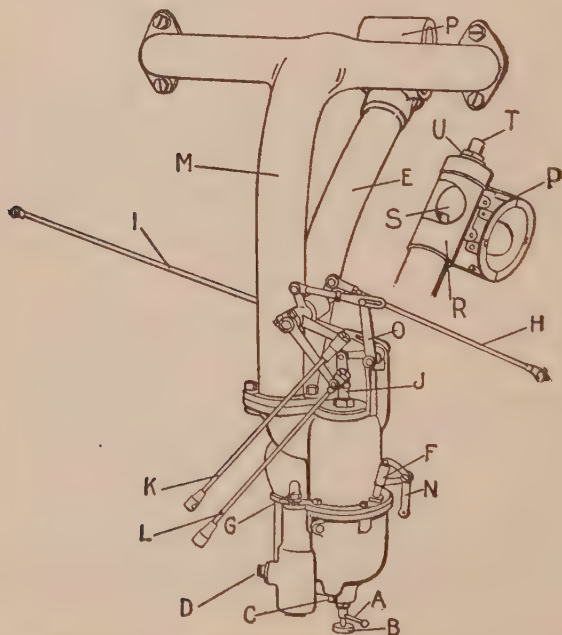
Center draught carburettor and connections. A, needle valve lock nut; B, needle valve; C, float chamber drain; D, fuel pipe; E, hot air pipe; F, primer plunger; G, float pin upper bearing; H, connection between intermediate lever and magneto operating lever; I, foot accelerator connection; J, throttle shutter; K, throttle control lower connection; L, ignition control lower connection; M, fuel inlet upper pipe; N, primer bell crank; O, throttle; P, hot air box; S, port hole; T, hot air adjustment; U, lock nut for same.
